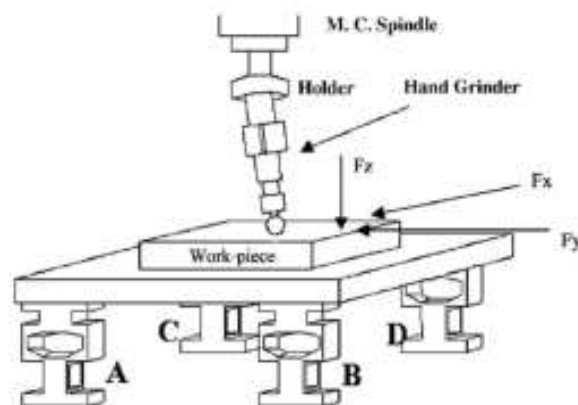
Strain gauges (labelled A-D) installed on grinding workpiece platform [14].
